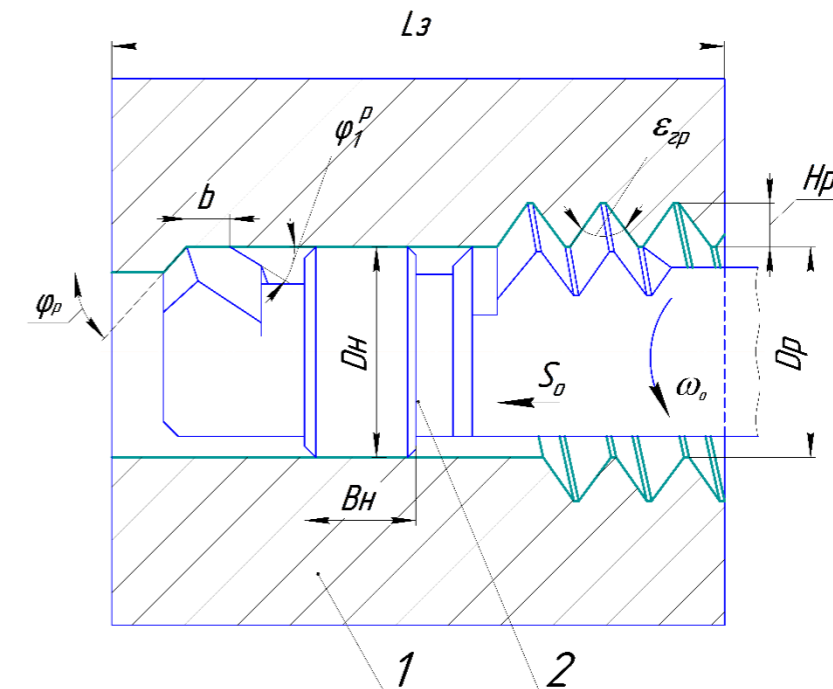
Chart of internal threading with a combined tool with a comb cutter with a guide
